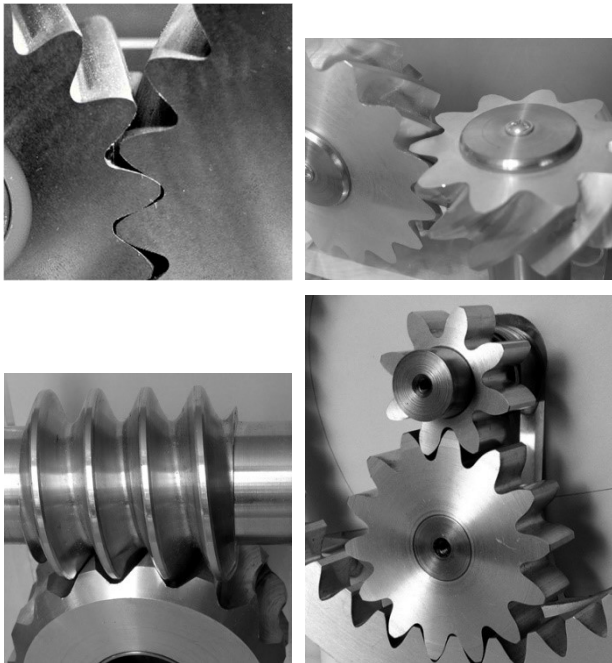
Working models for various S-type gearings: (a) helical; (b) crossed helical; (c) ZS worm drive; (d) planetary arrangement [11]
